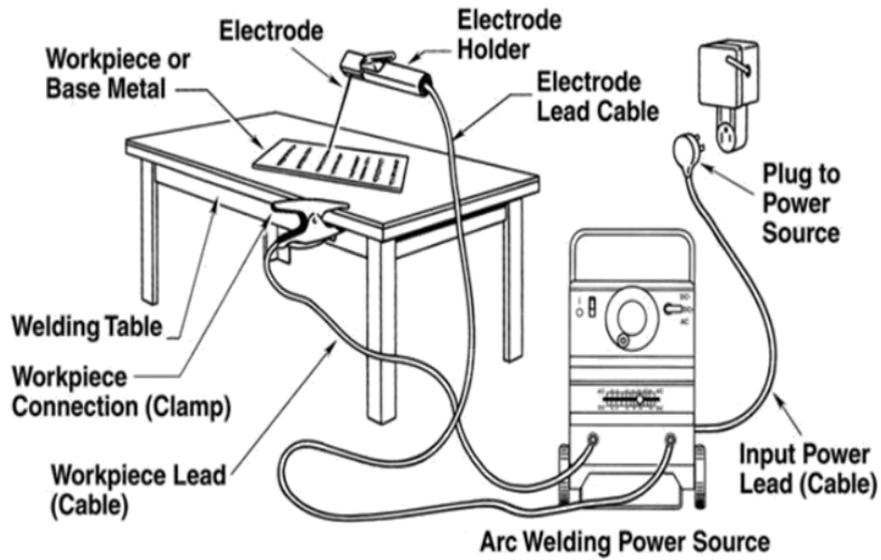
A schematic diagram of manual metal arc welding (<https://www.weldingis.com/>)
